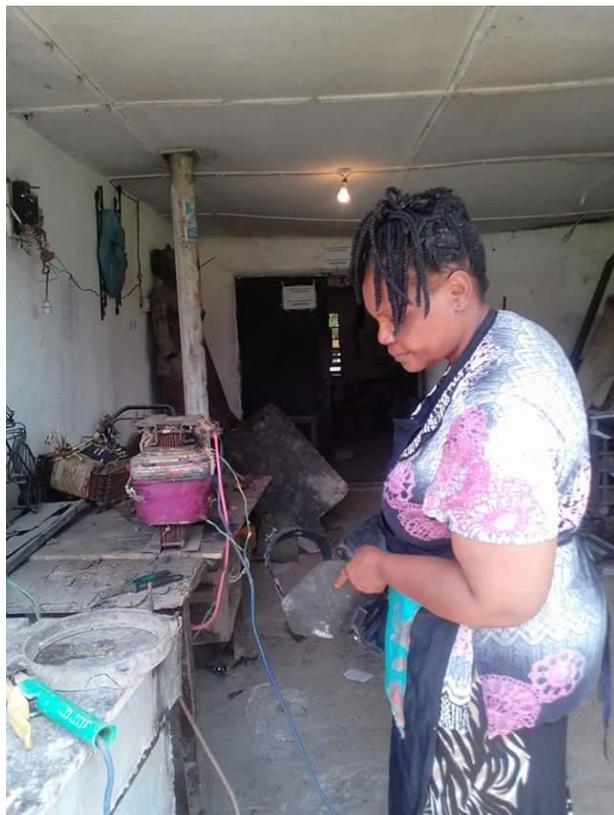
Welding parts of Night Soil Woman, 2, Photograph: Okogwu Antonia, 2016
